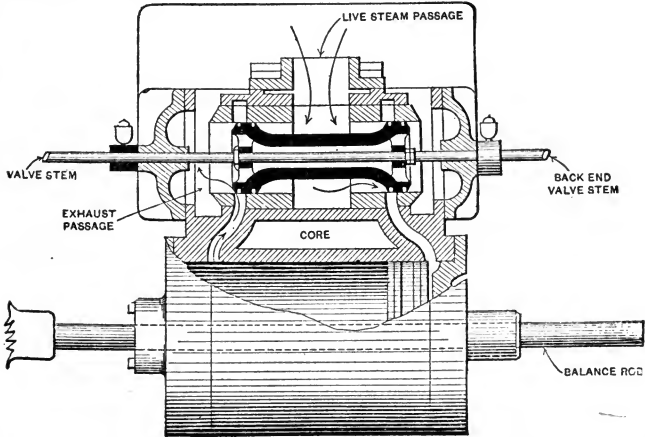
,924.—Sectional view through valve ports and valve chest showing piston valve of the inside admission type.
